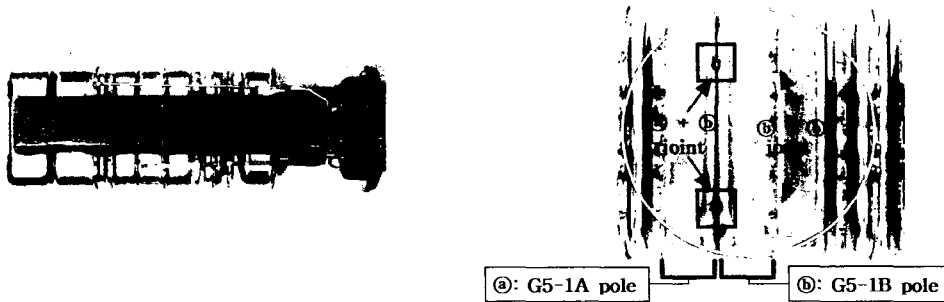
General view of laser welding points of electron gun in braun tube
